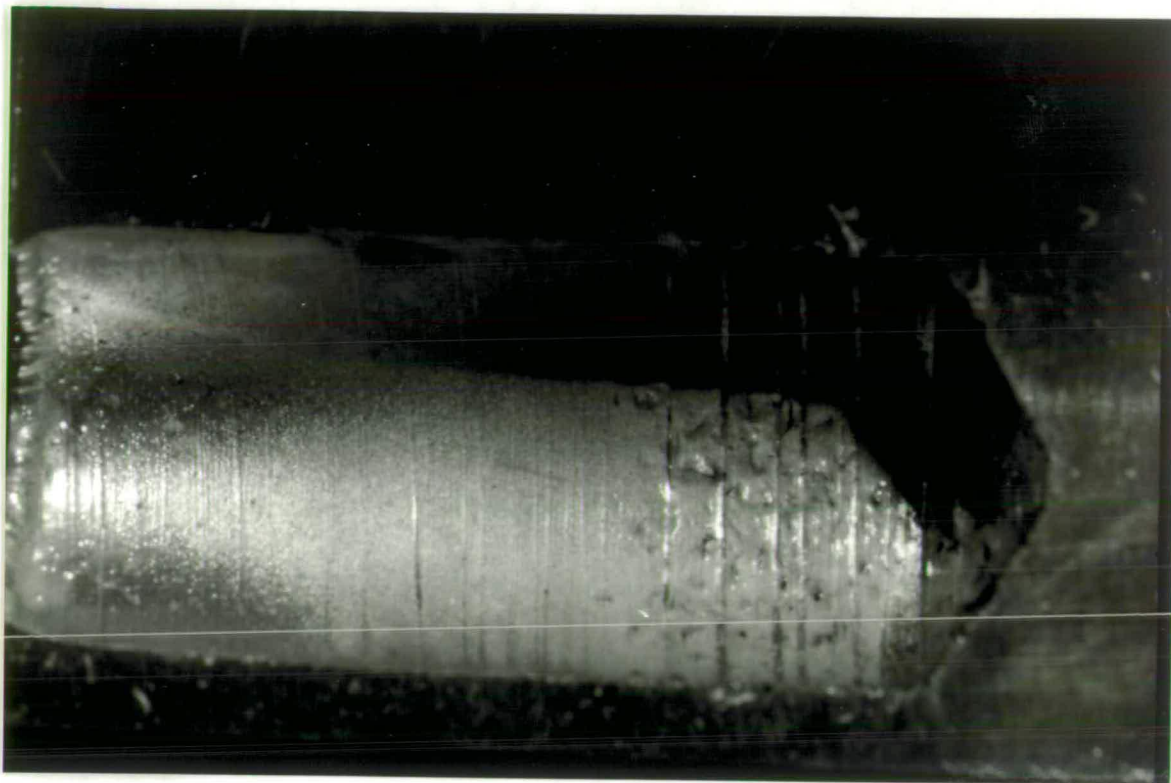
Sectional Surface Produced by D.C. Plating with Insulating Plate
